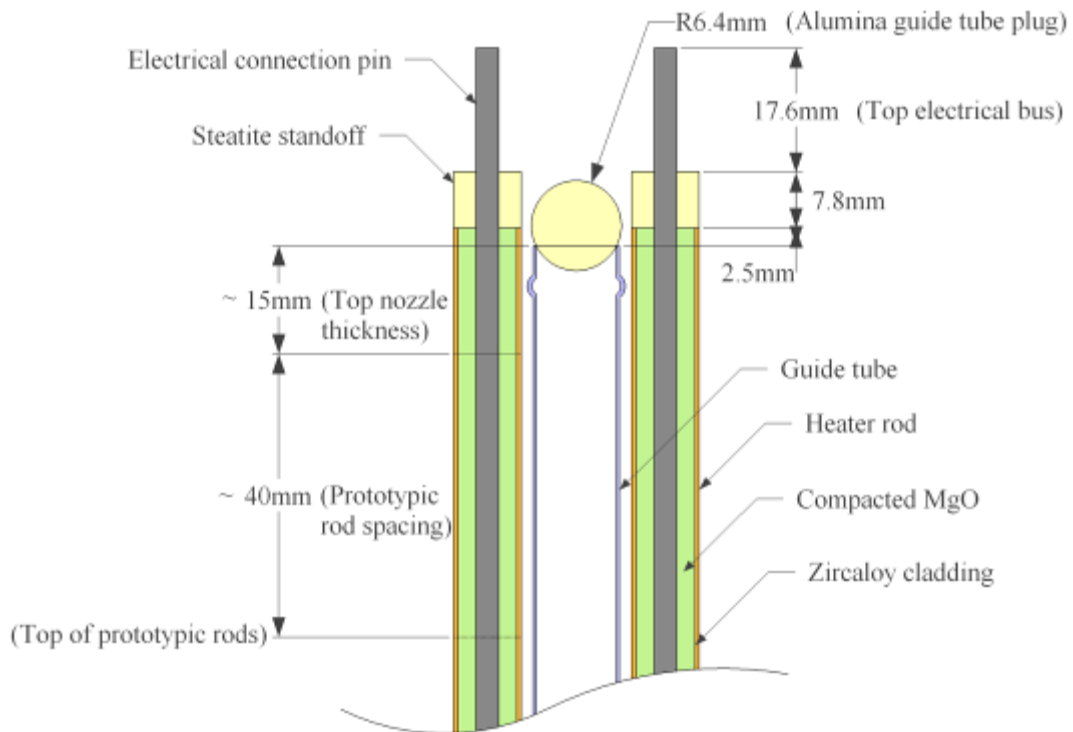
Detail drawing of the top of the assembly showing two heater rods and a single guide tube
